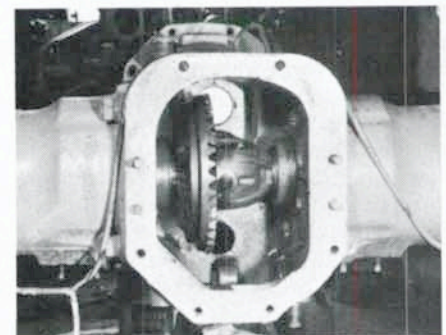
View showing the D-14 and D-15 differential unit installed.
